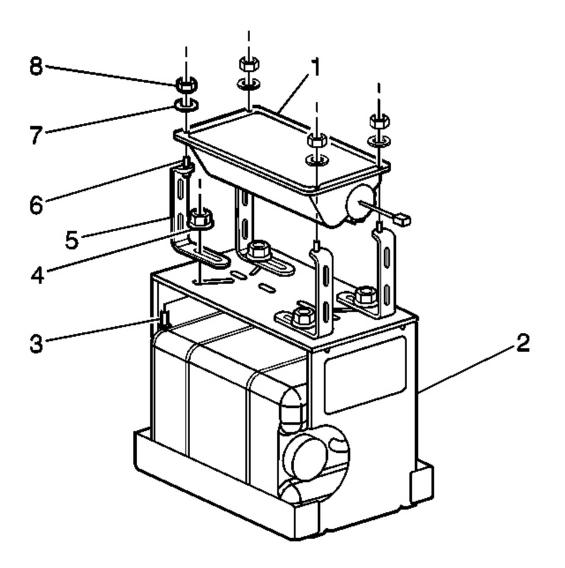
Identifying I/P Module Components Courtesy of GENERAL MOTORS CORP.
